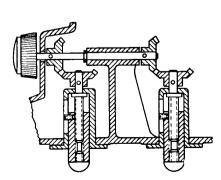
A parallel arrangement of tandem screw threads raises the projector evenly.
